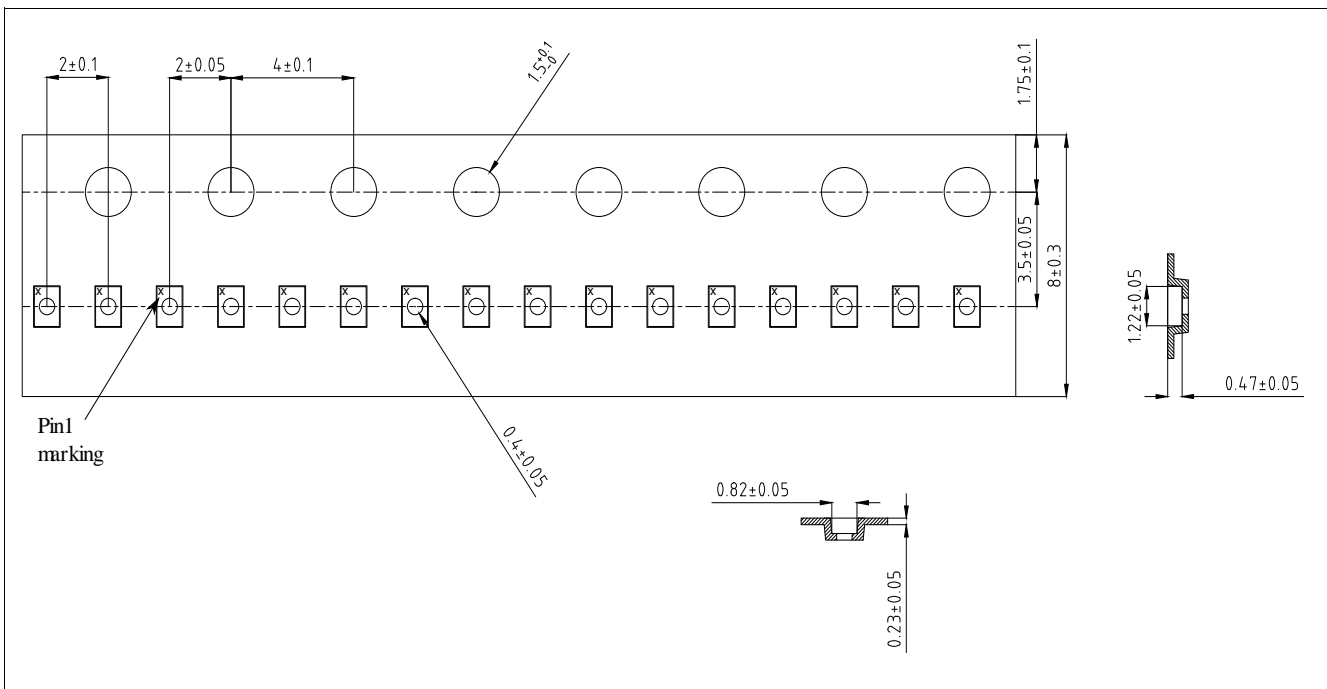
Tape & Reel Dimensions TSNP-6-10 (reel diameter 180 mm, pieces/reel 12000)
